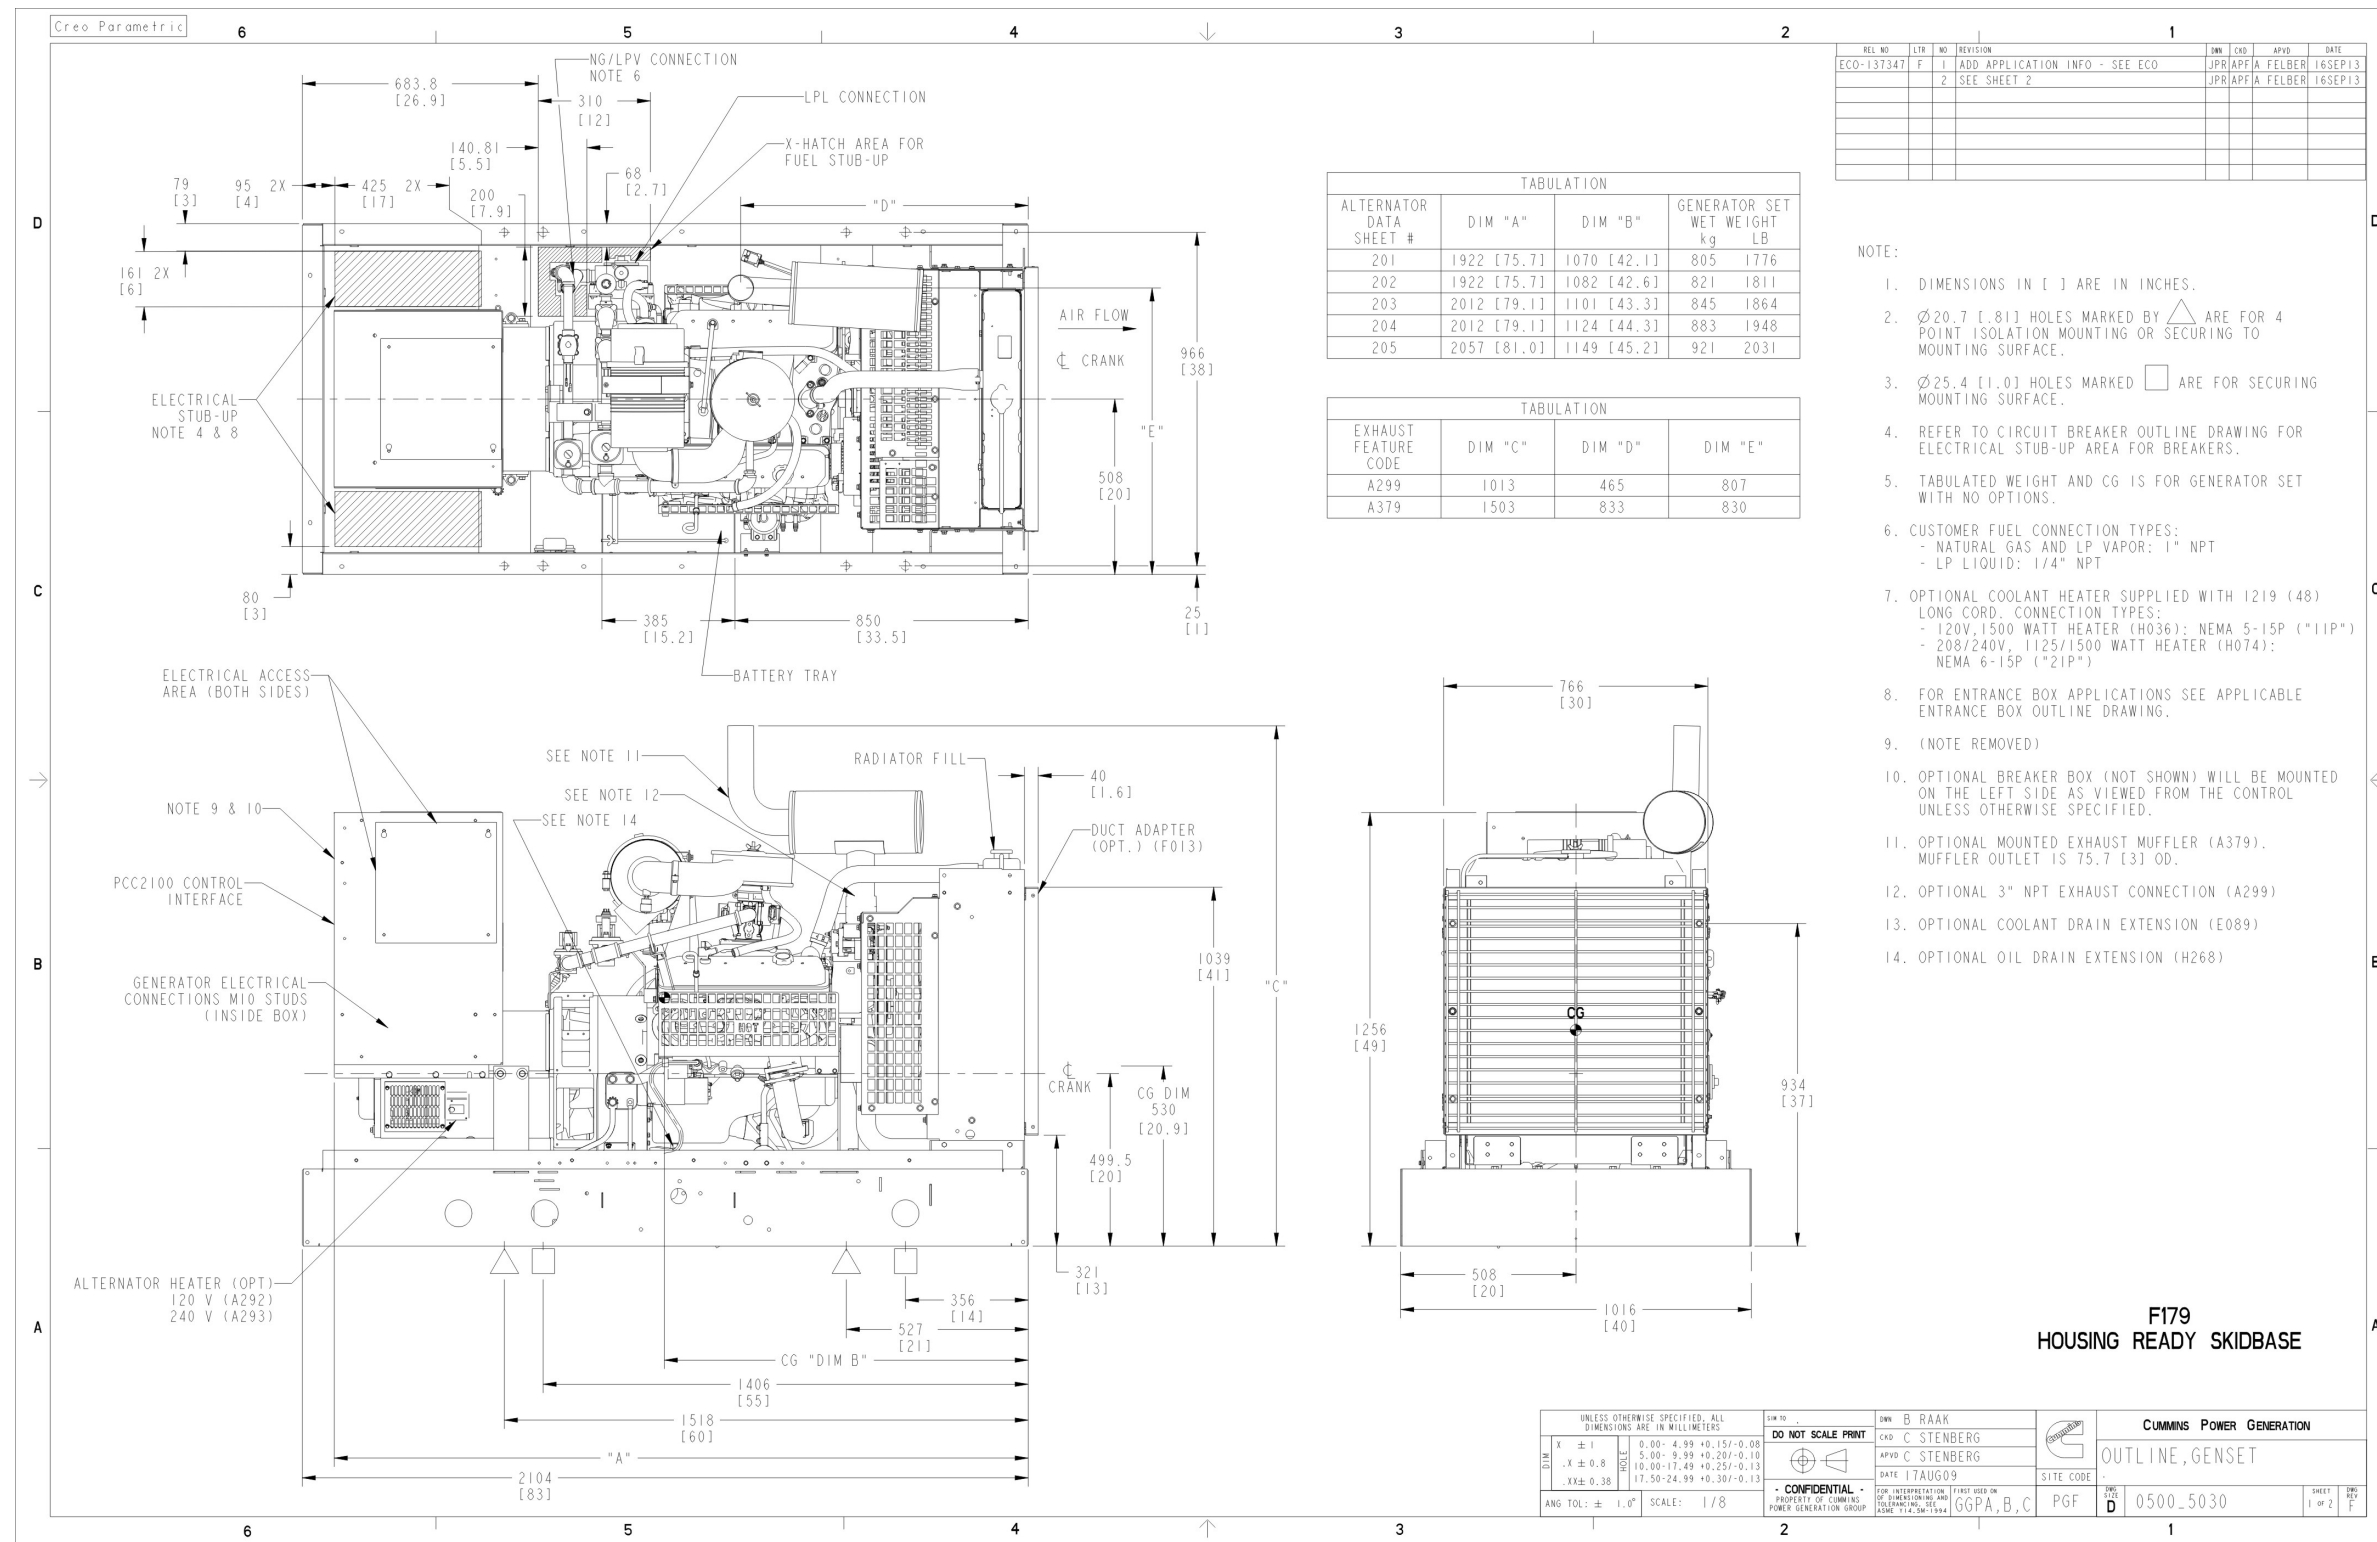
OUTLINE DRAWING (0500-5030 SHEET 1)
